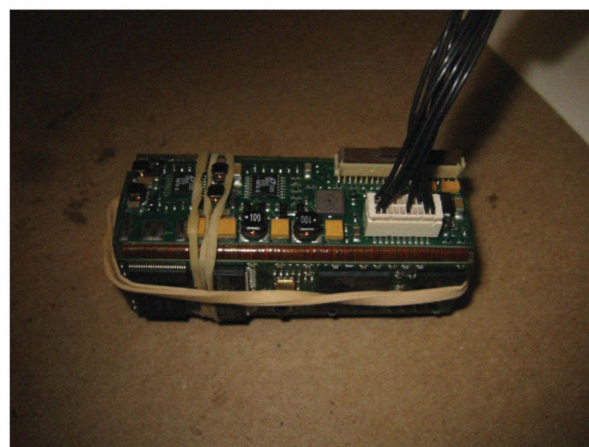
Electronic assembly containing 100 sensors and dual processors
